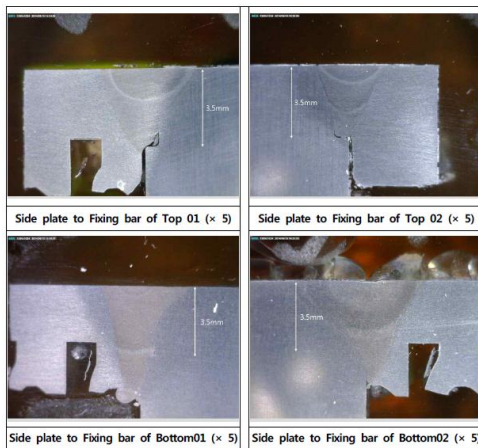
Macro-sections of the upper and lower welds with side plate to fixing bar parts.
